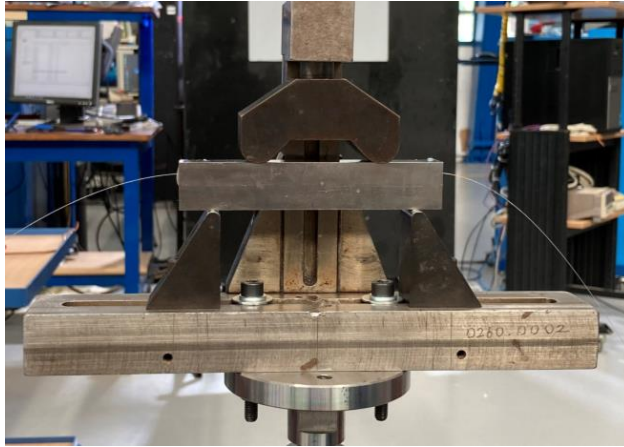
Experimental setup of a four-point bending test on Aluminium 6082-T651 specimens
